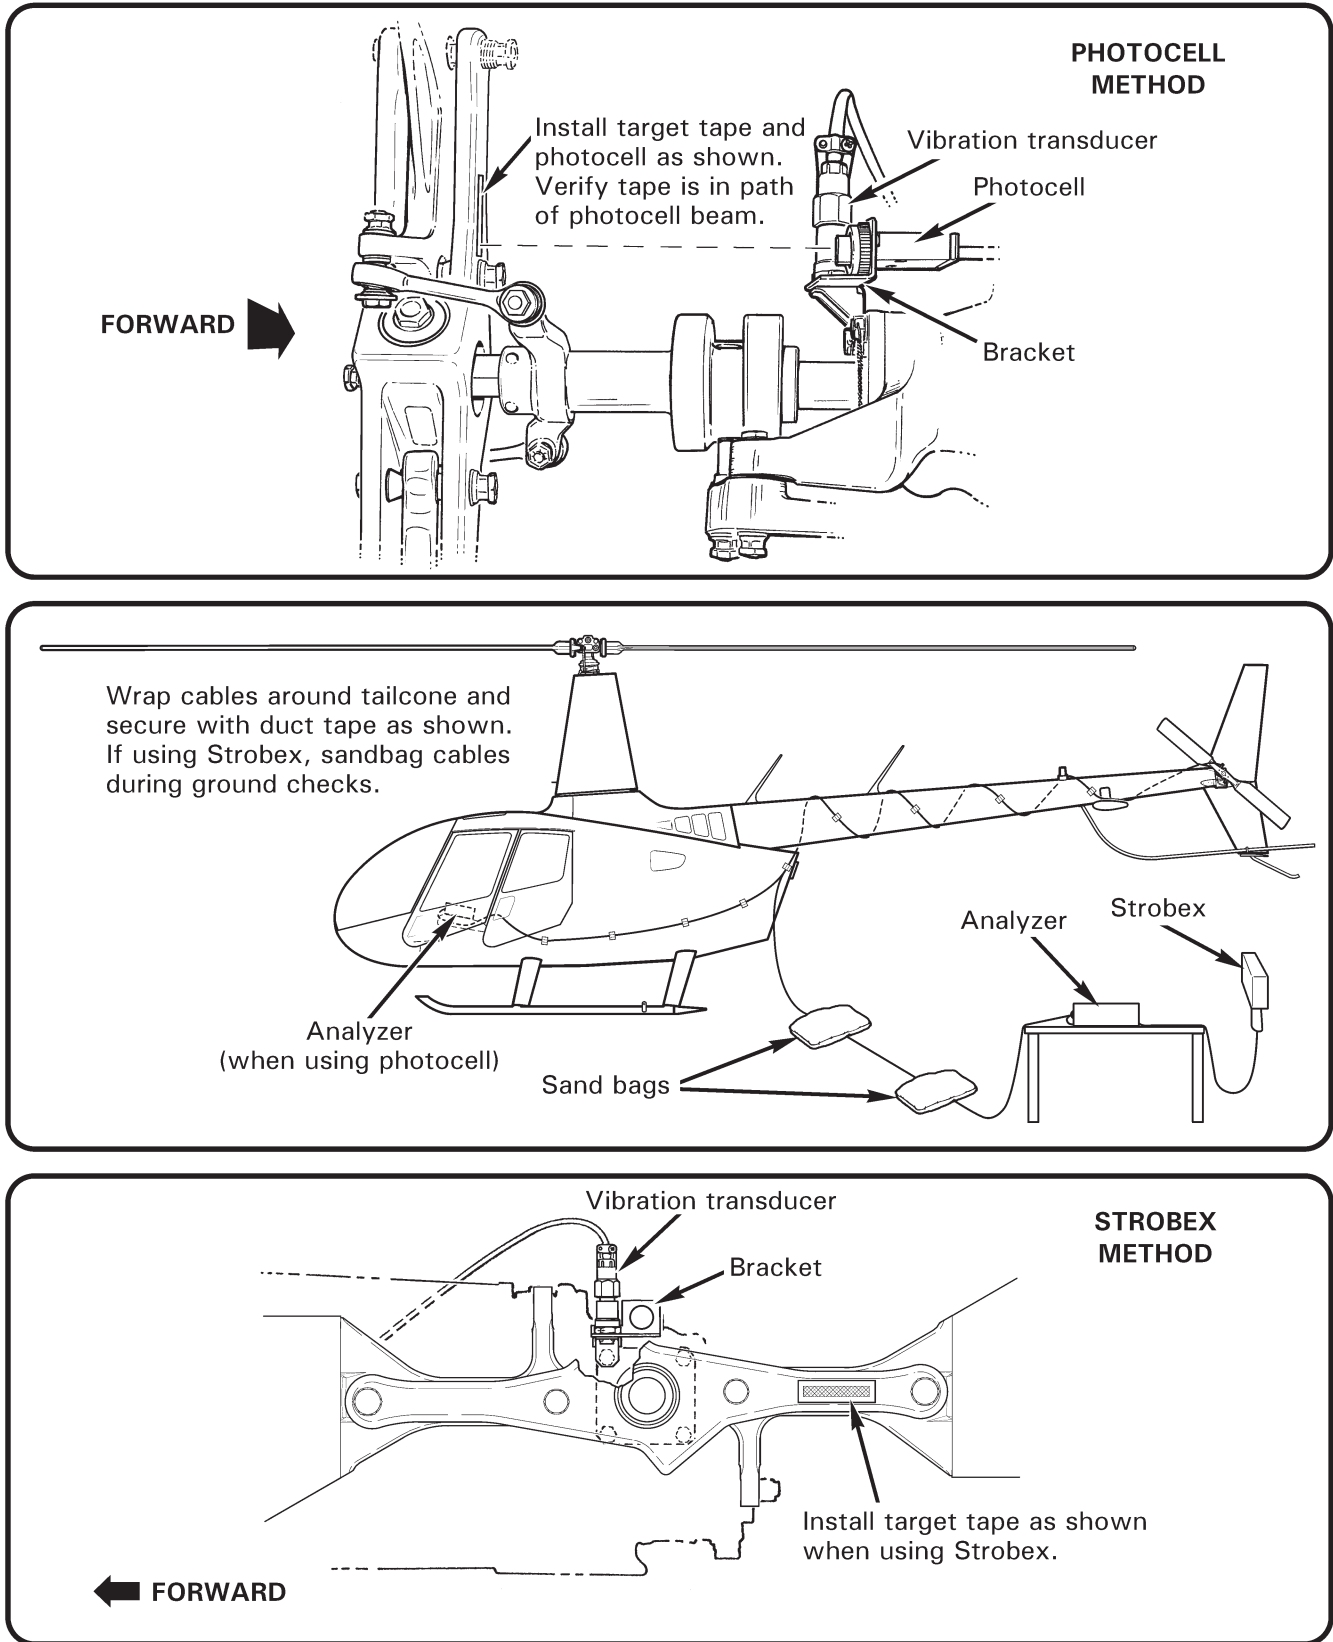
TAIL ROTOR BALANCING EQUIPMENT INSTALLATION
